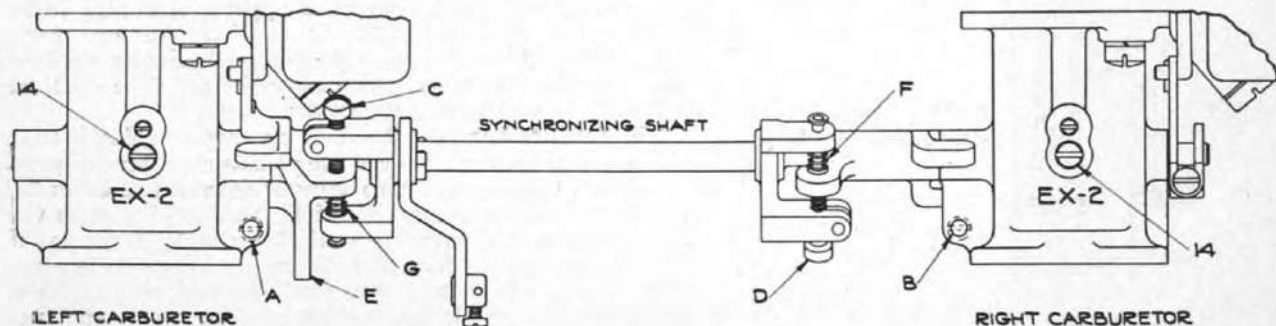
Diagram showing hook-up employed to synchronize the throttles of the two carburetors employed on this twelve-cylinder engine
